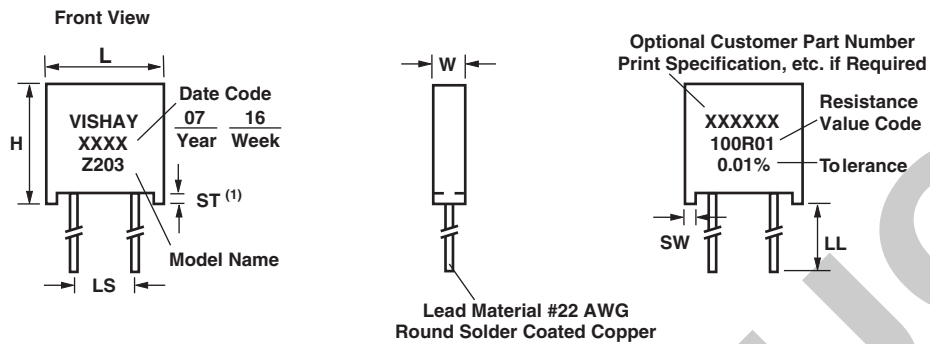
STANDARD IMPRINTING AND DIMENSIONS
